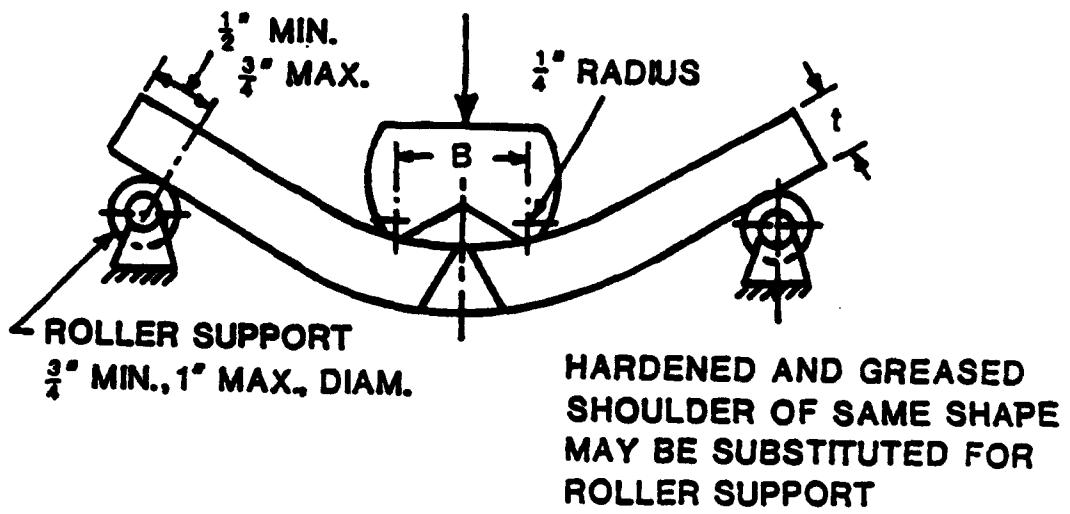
Schematic of free bend test apparatus showing initial bend fixturing.
